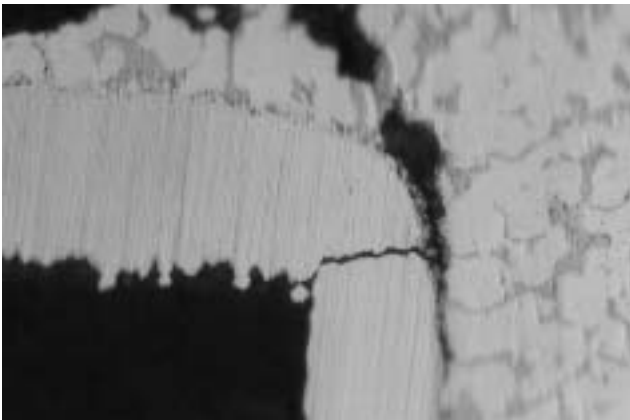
Corner cracking in double-sided PCB (200×)
